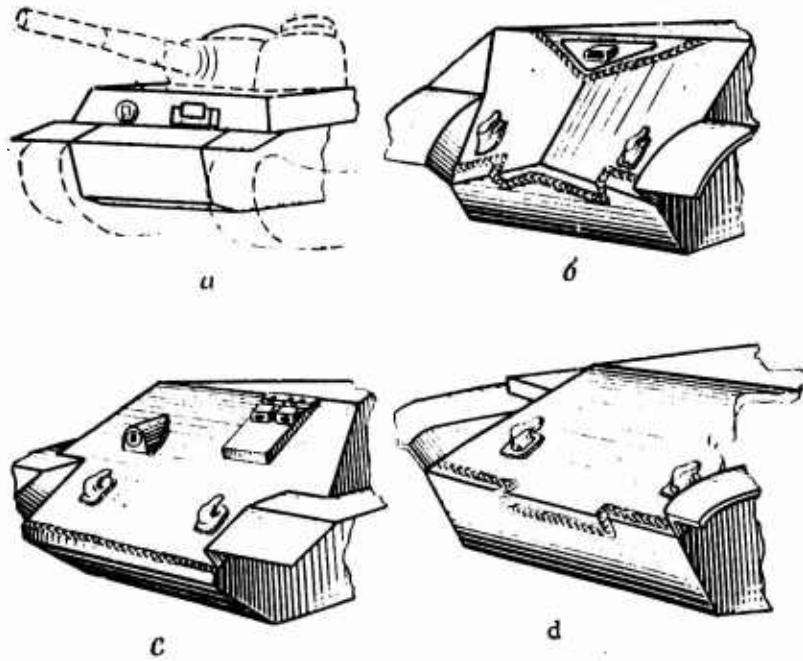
Tank Hull Nose Shapes: a -- KV; b -- IS; c -- T-34; d -- T-55
